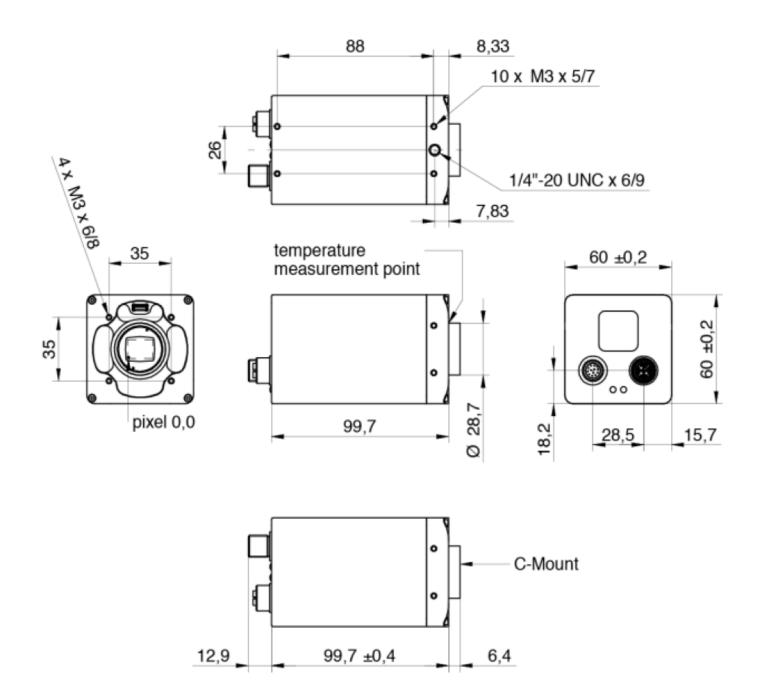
Technical drawing of DS-CAM-640c & DS-CAM-1100m
